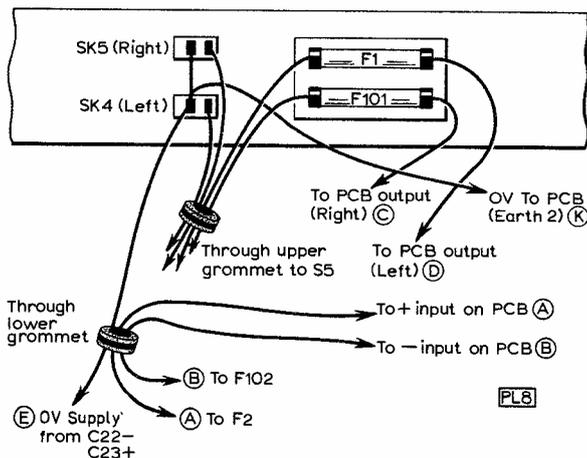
Details of sockets SK4, SK5 and loudspeaker fuse mounting.
